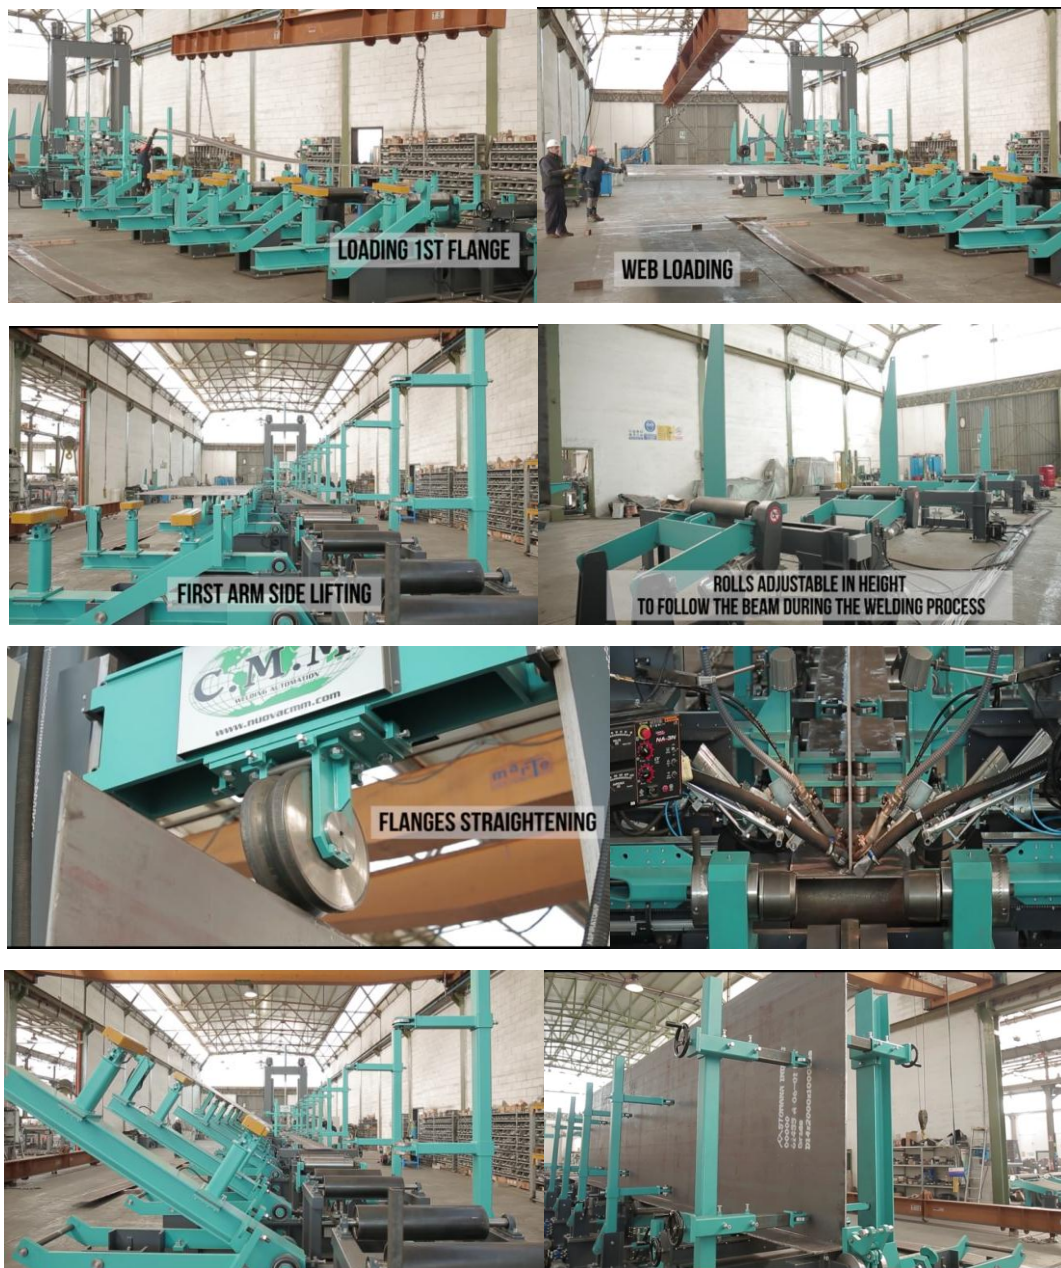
6,7,8,9,10,11,12,13:Automatic steel H-beam welding machine
